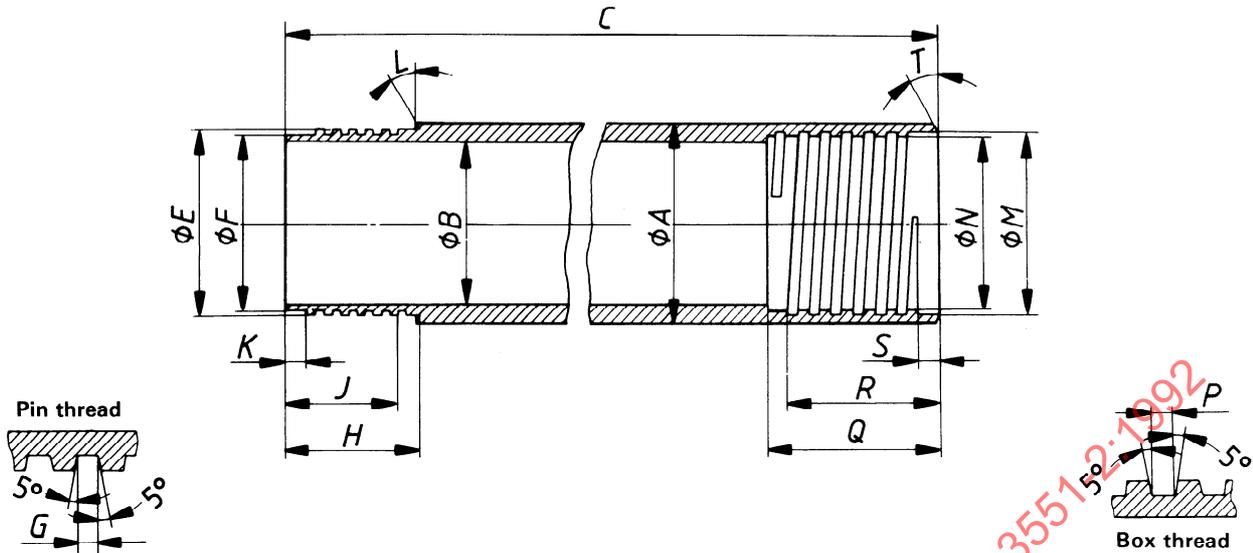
“WG” design double-tube core barrel – Outer tube (see table 33)
